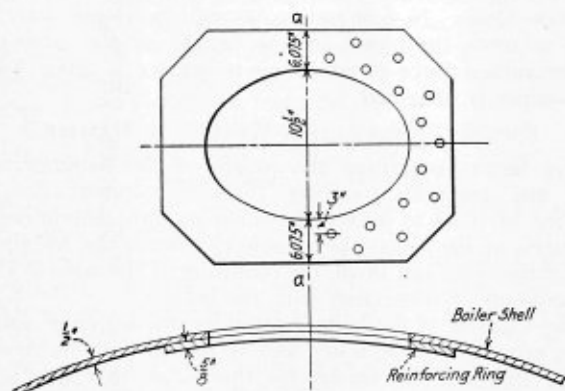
Reinforcing Frames Riveted to Boiler Shell Around Manhole Opening
